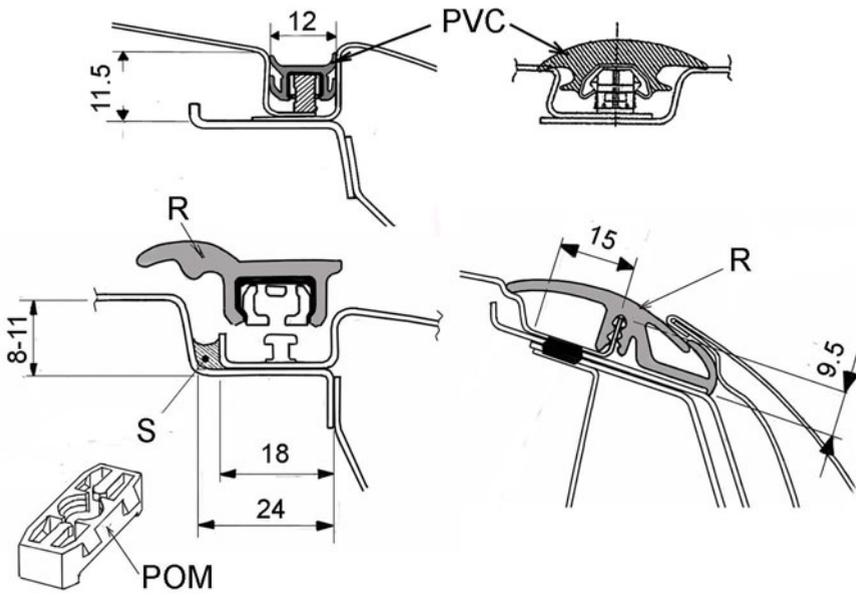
Examples of plastic outer roof moldings and details of fitting devices. R: rubber; S: sealant.
